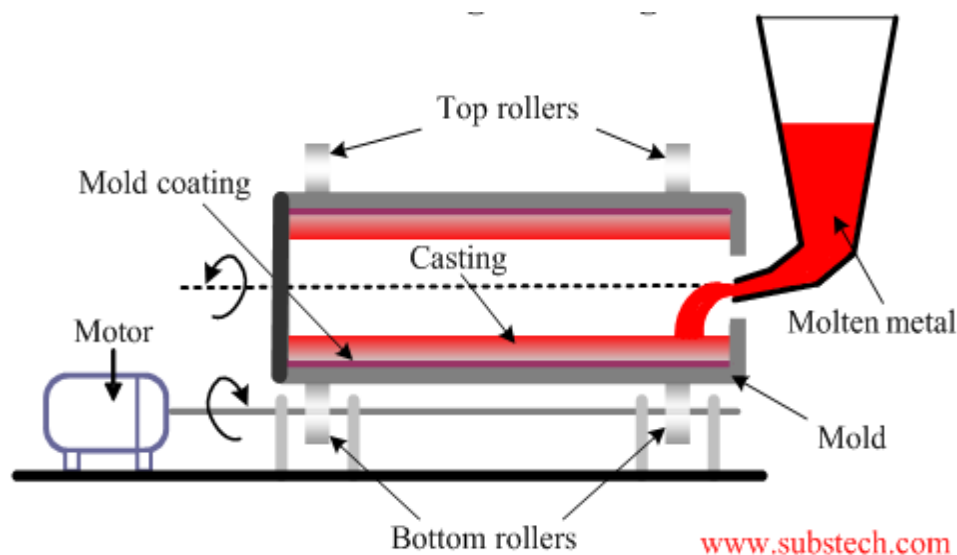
Schematic set-up for horizontal centrifugal casting process [12]
